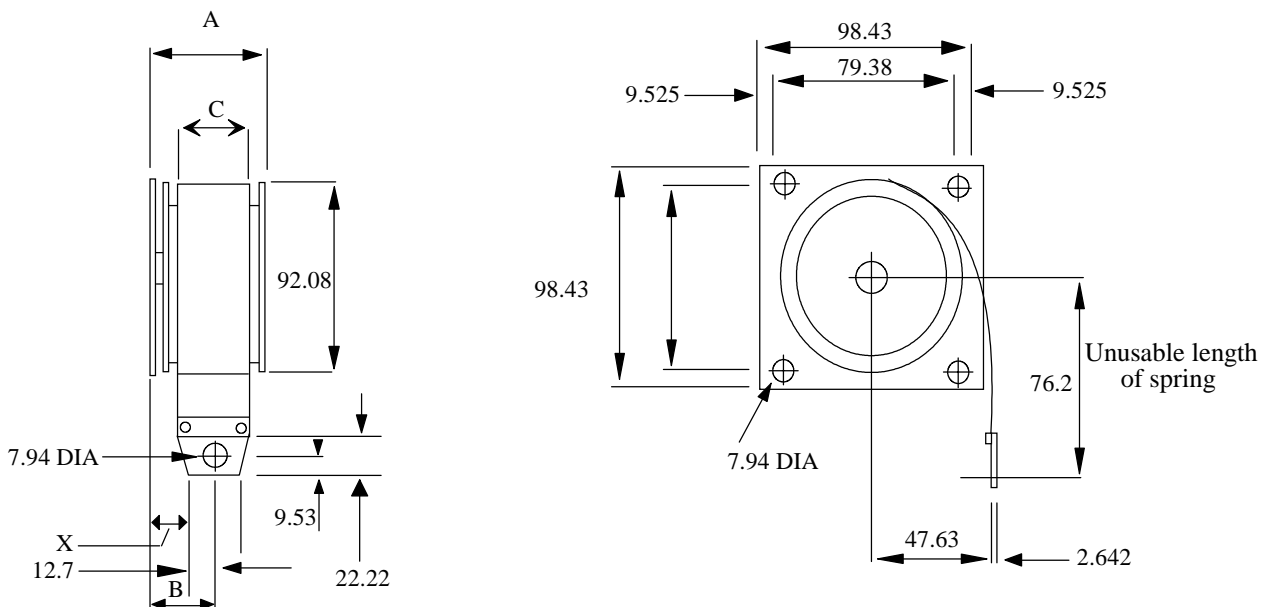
Orthographic drawing of a similar type of spring (Please Note: All dimensions are in mm)
